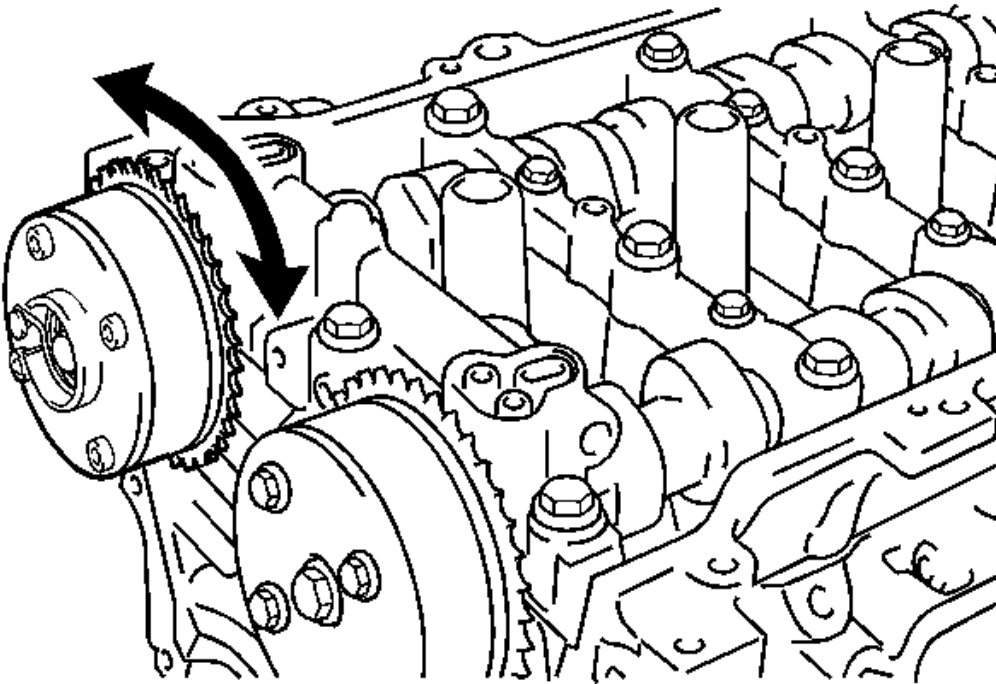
Turning Camshaft Timing Exhaust Gear Within Movable Range
